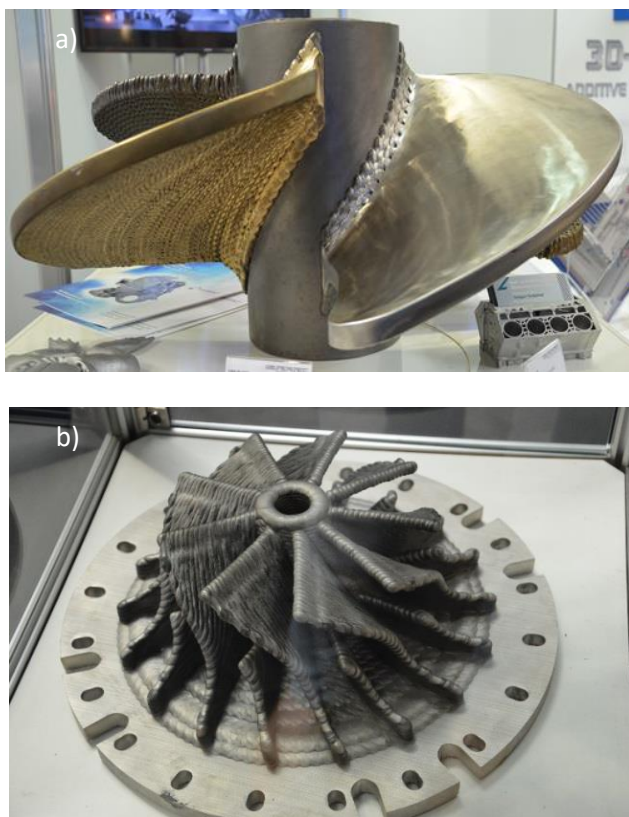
Examples of components made by the WAAM method: a) propeller produced directly on the finished cylindrical blank, b) turbine designed for comprehensive machining in five axes
